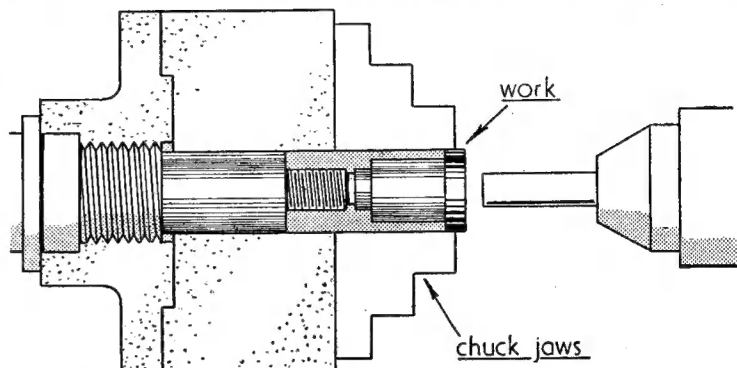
The fitting in use for aligning a work-piece in the chuck
